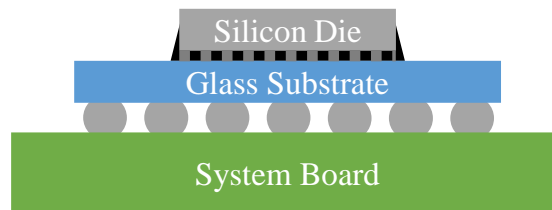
Cross section schematic of a glass ball grid array package for smart mobile application.
